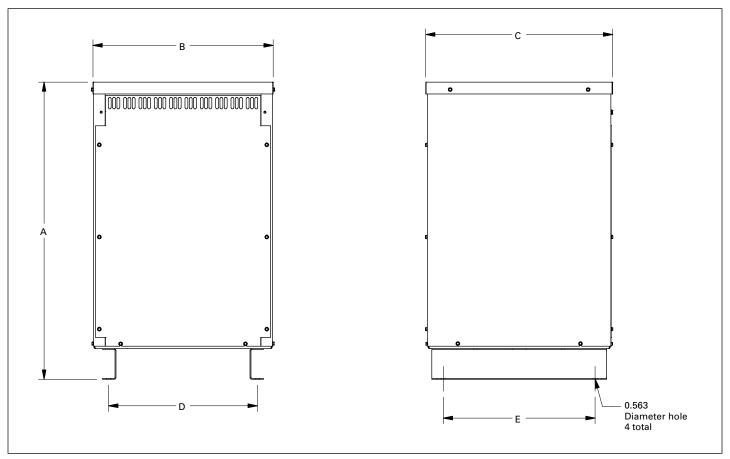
Single-phase enclosures - dimensions in inches (mm)
